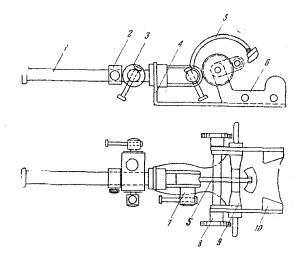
Diagram of head-holder (1/2 natural size). 1) Arm; 2) connector for fixation; 3) angle connector for fastening arm to support; 4) base of head-holder; 5) nosepiece; 6) side plate; 7) fastener for nosepiece; 8) fastener for jaw clamp; 9) jaw clamp; 10) rest for lower jaw.
